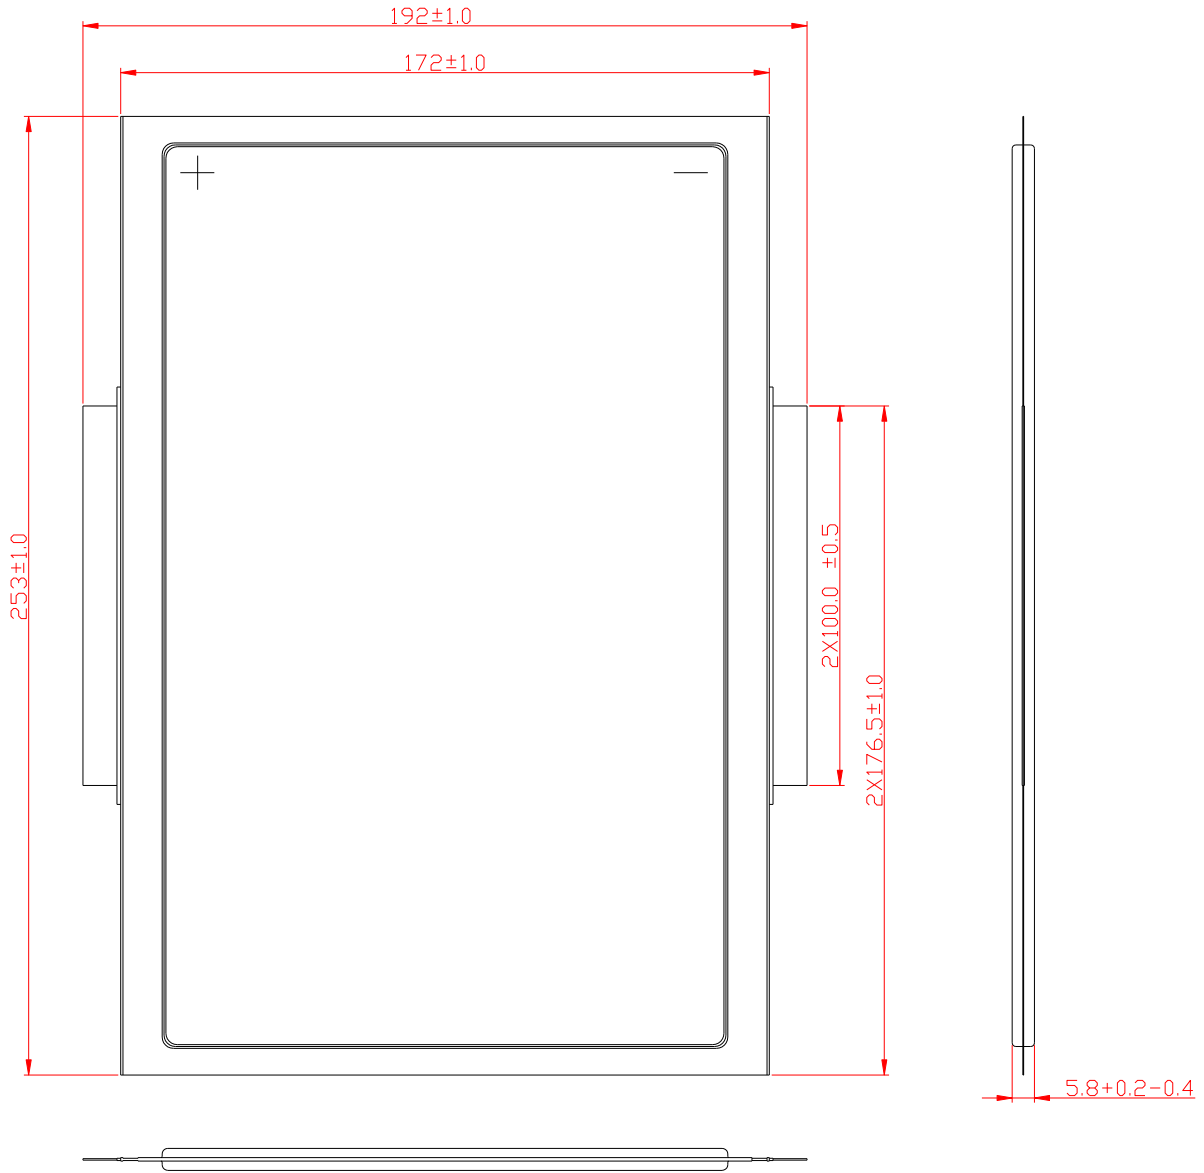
Lithium ion Rechargeable Cell Outline Drawing
